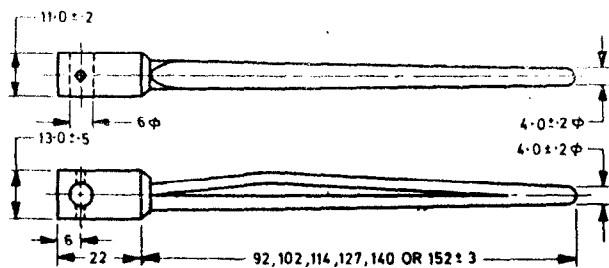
A TYPICAL TONGUE WITH SINGLE SPRING
